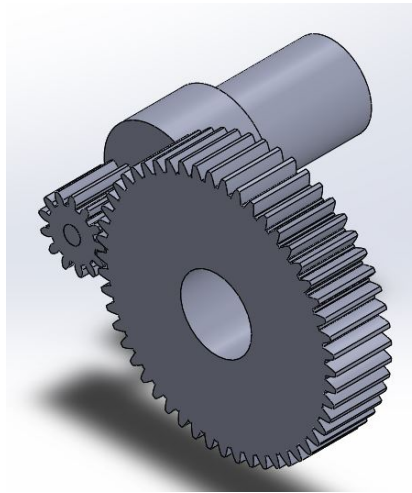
SolidWorks Concept Model of Gear Train Assembly
